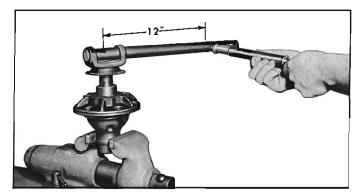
C-15—Checking Clutch Pack Pre-Load—On the Bench
